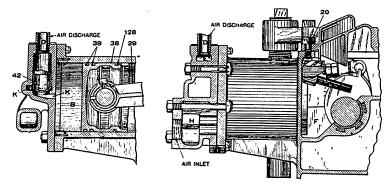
Type D-EG Compressor with Cylinder Cover in Section
